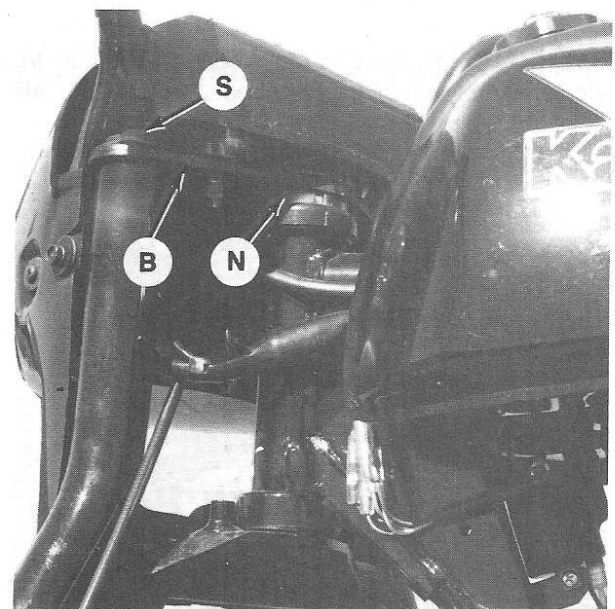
View of steering head assembly. Rotate slotted nut (N) to adjust steering play. Refer to text.
